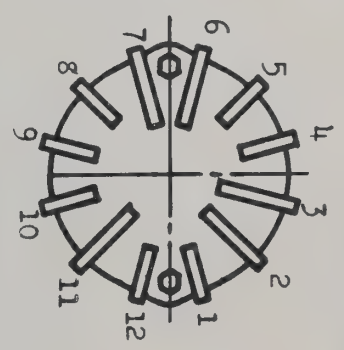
C. SW1, V.F.O. BANDSWITCH TOP VIEW
